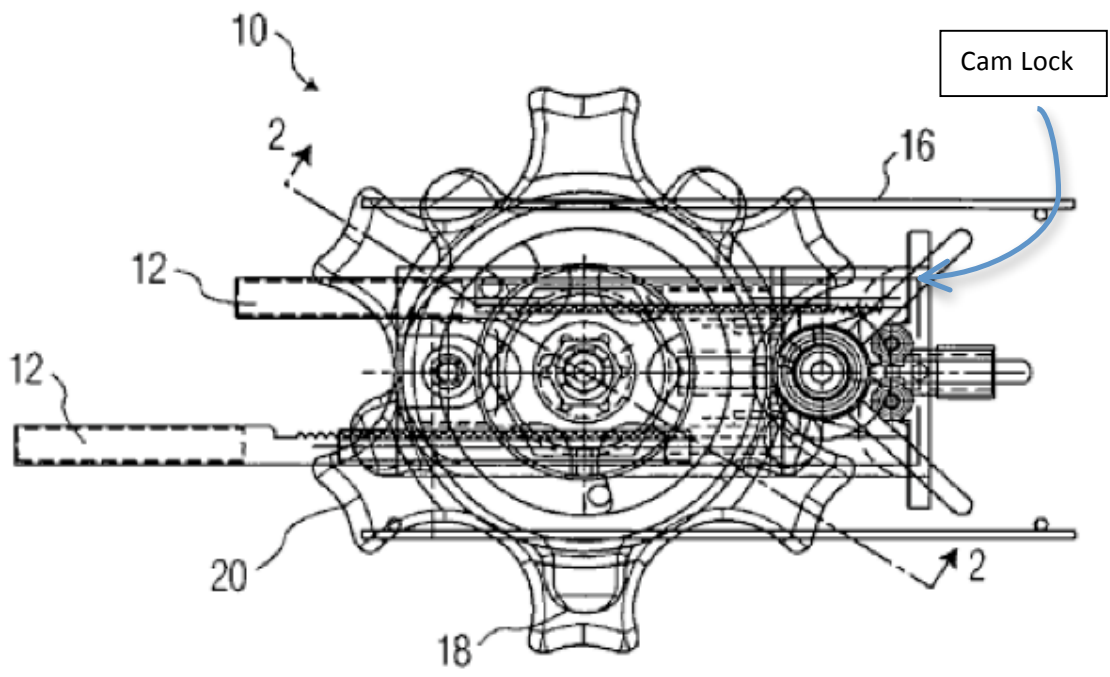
Top View of the knobs and cam locking system. Refer to section 2.6 for more details [8].
